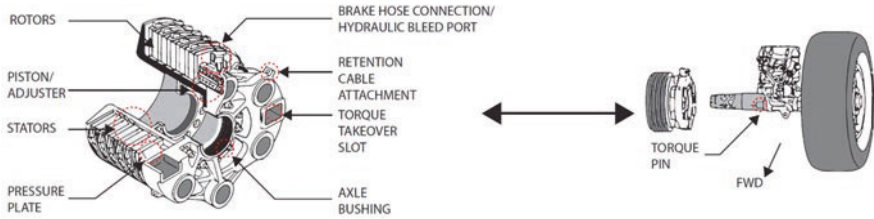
Detailed structure of the Boeing 737 aircraft brake assembly
